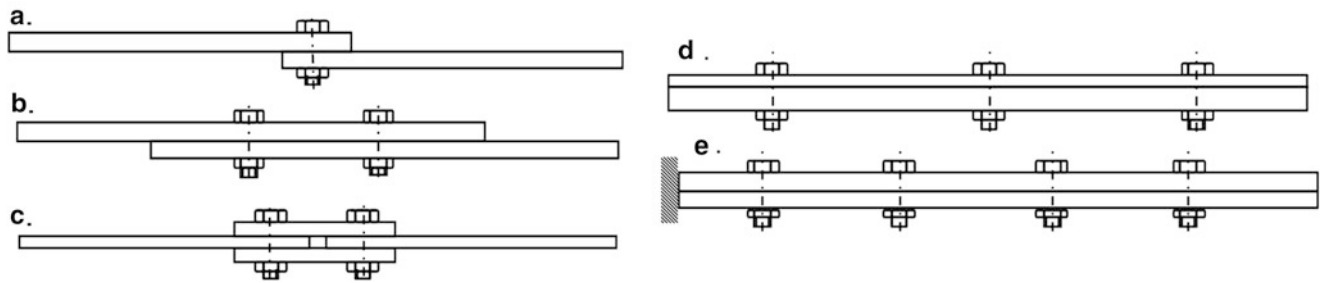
Examples of testing devices developed to highlight friction induced damping in joints. (a) Beam assembly with a single bolted joint from Ahmadian et al. [1]. (b) Beam assembly with two bolted joints from Metherell et al. [12] or Esteban et al. [6]. (c) Beam assembly symmetrically screwed with two bolted joints from Song et al. [19]. (d) beam assembly with distributed bolted joints in free conditions from Heller et al. [10, 11]. (e) beam assembly with distributed bolted joints in clamped-free conditions from Goodman et al. [9], Nanda et al. [13, 14]
